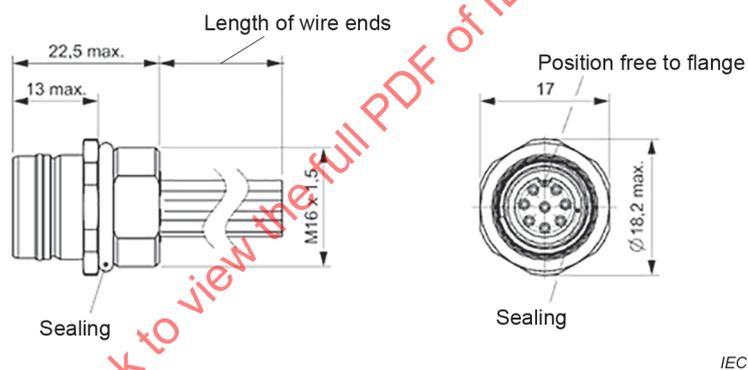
Fixed connector, female contacts, mounting with thread M12 × 1 and outer push-pull locking, with wire ends, single hole front mounting thread M16 × 1,5
